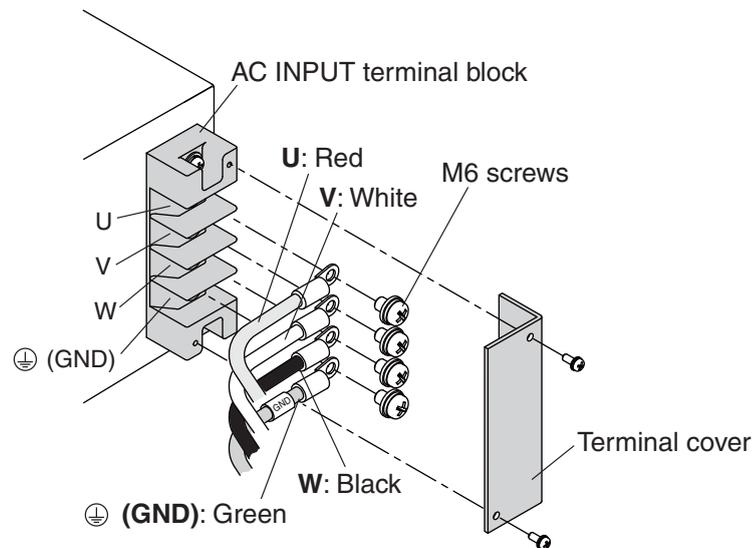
Connecting the power cable (example in which the optional power cable is used)
